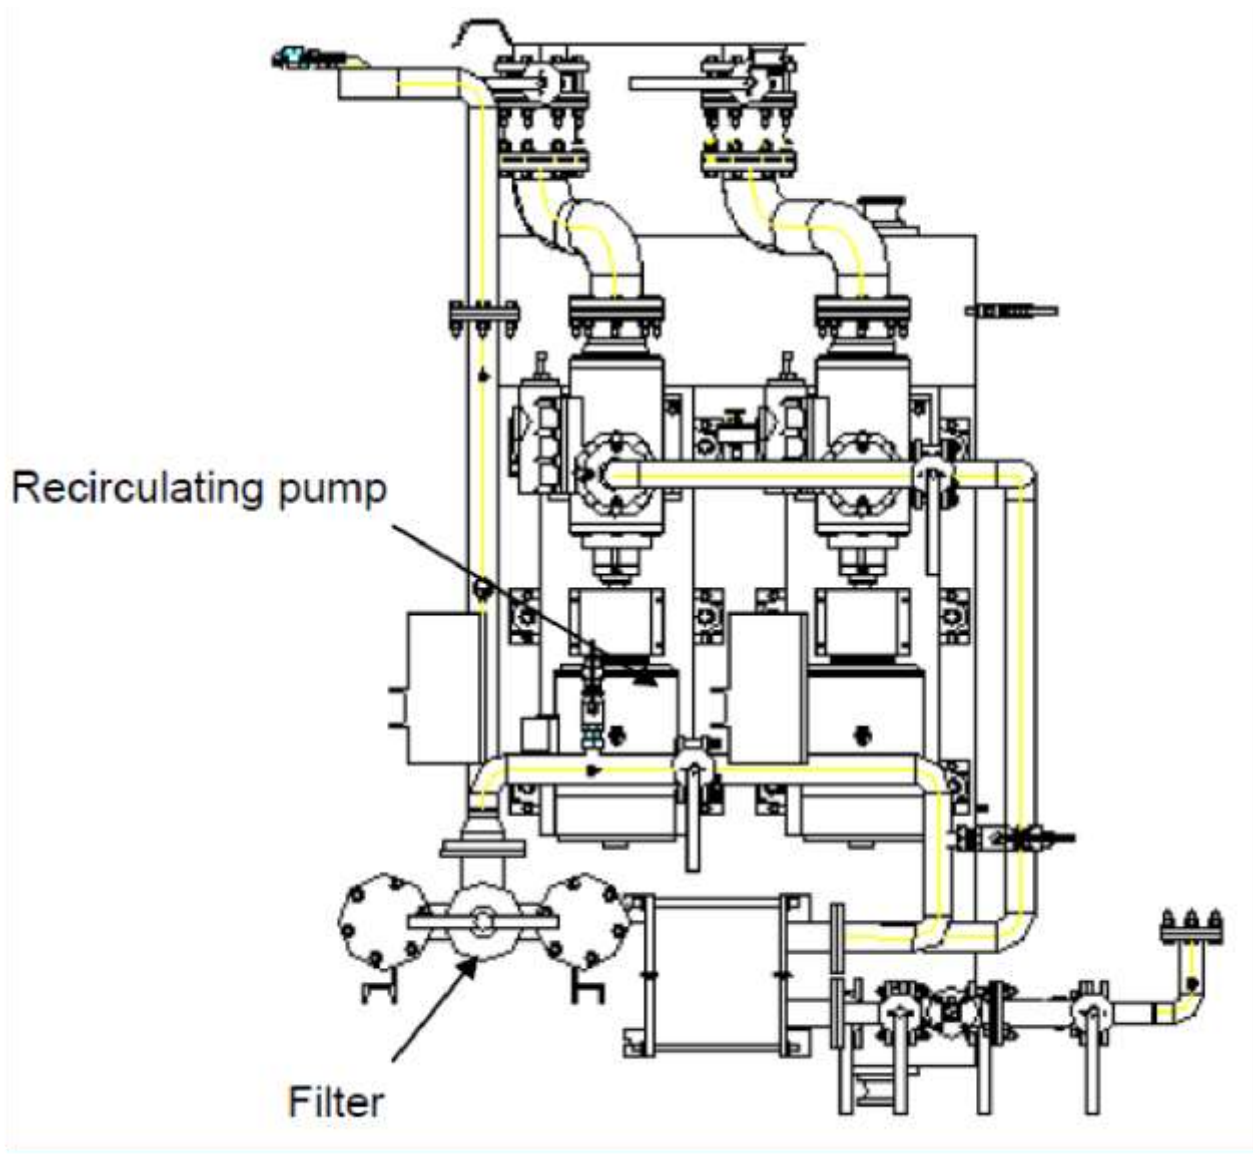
Typical Hydraulic Recirculating Pumps
